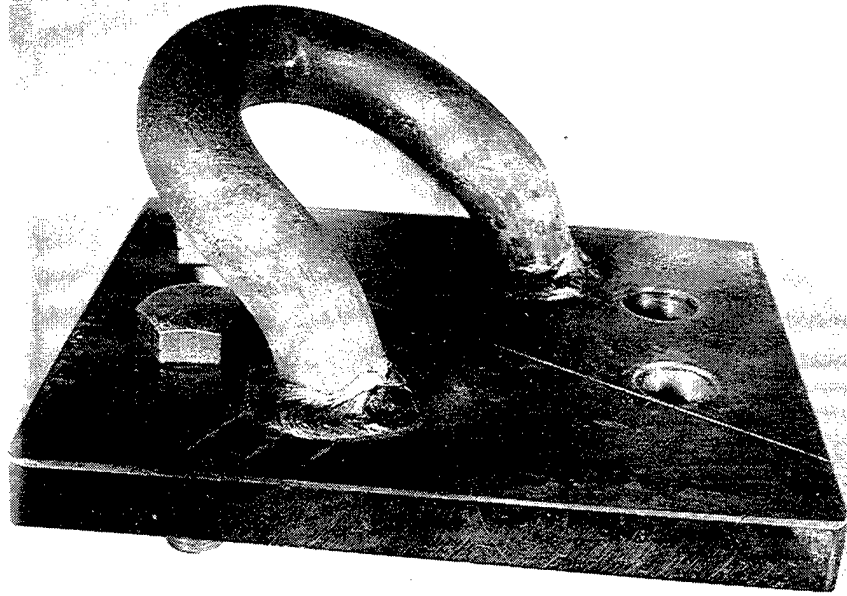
Close-up view of the damaged new lifting device after its removal from the test jig in Figure 110. Although not clearly seen in the photograph, cracks had occurred in the upper toe of the fillet welds on both legs of the U-shaped bar.
